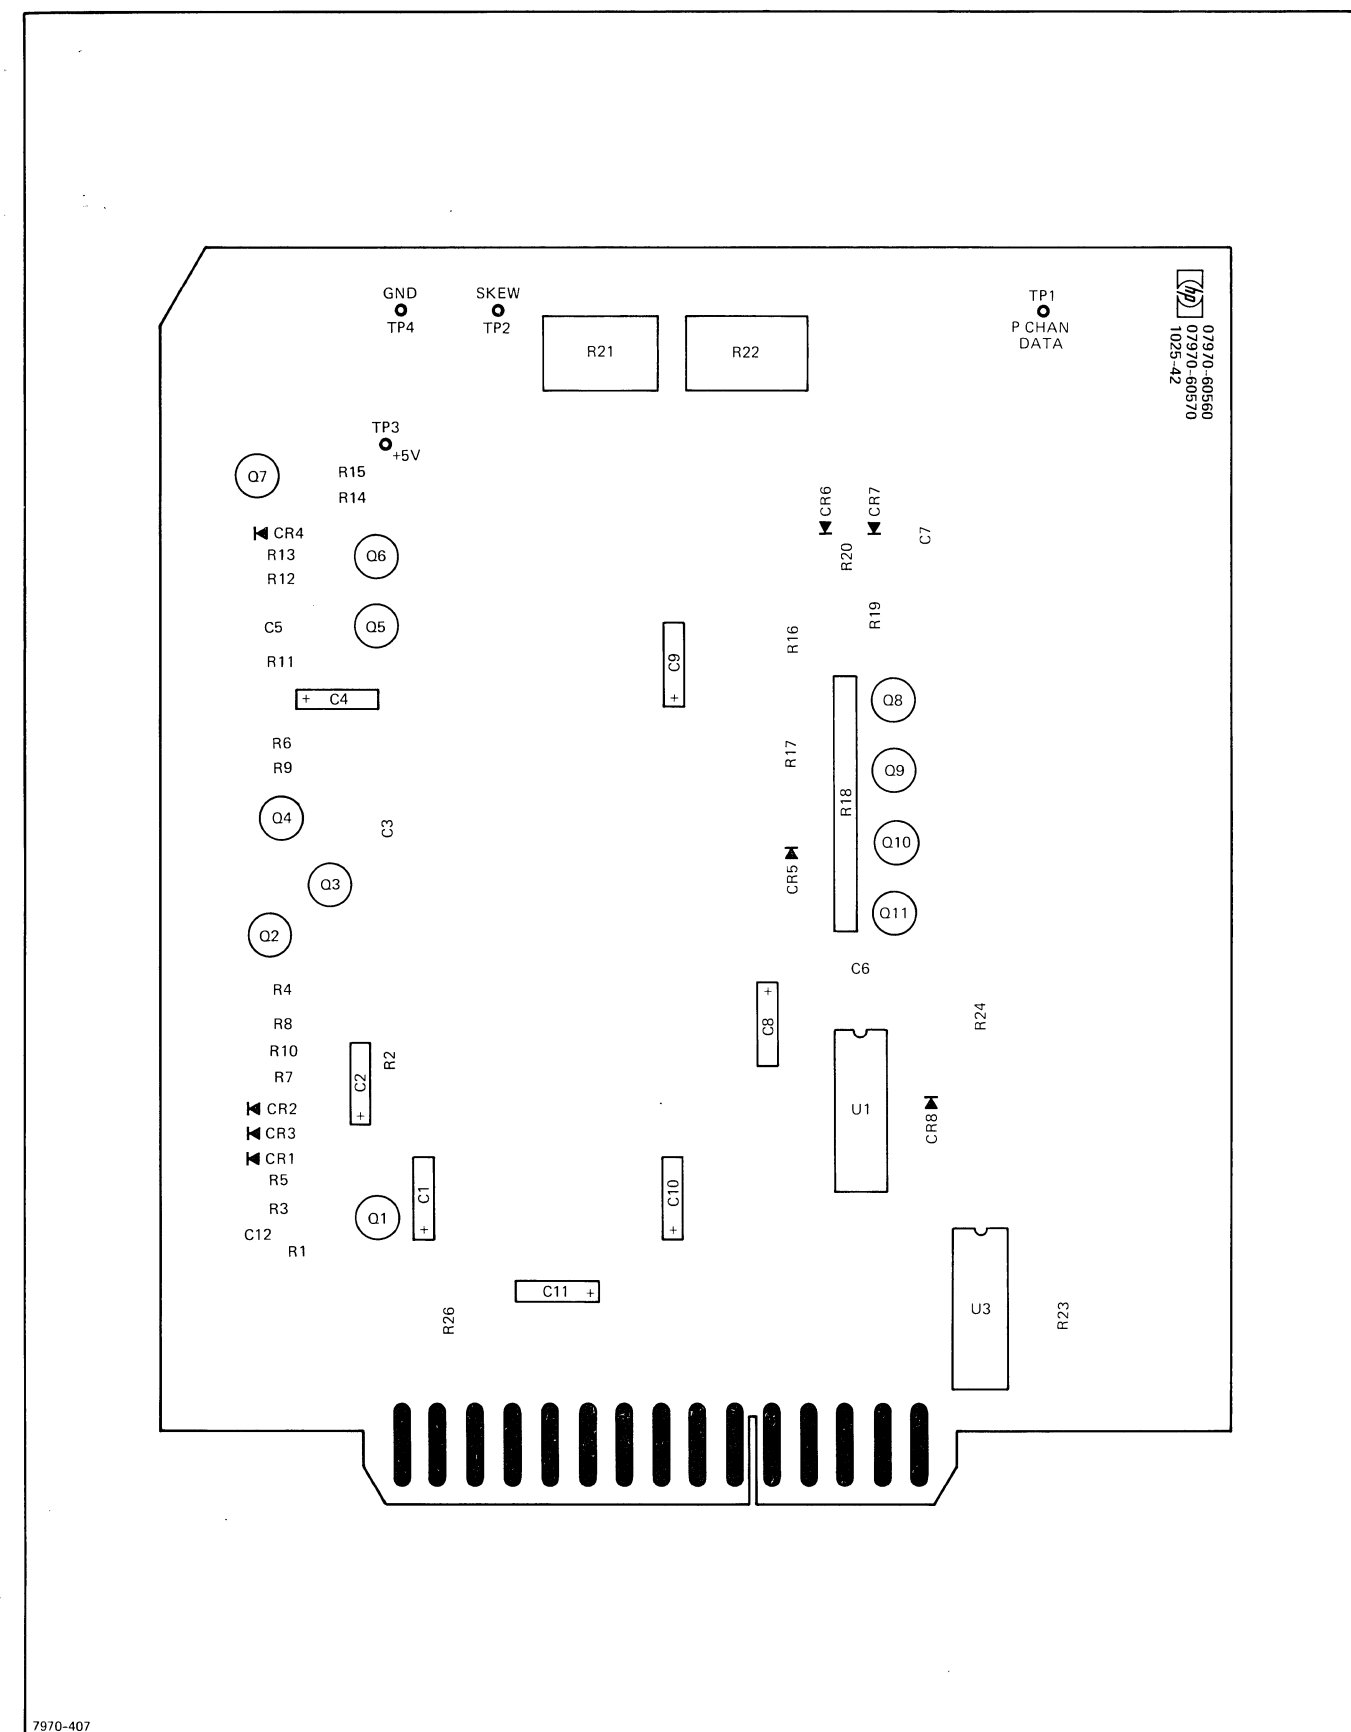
Single-Channel Read Data PC Assembly A18A2, Parts Location Diagram
